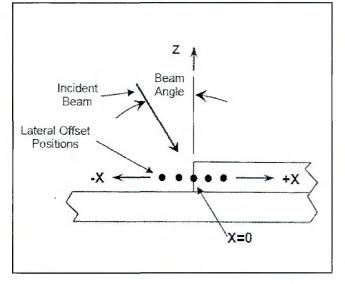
Sketch of beam presentation positions for lap-fillet welds with diode laser.
